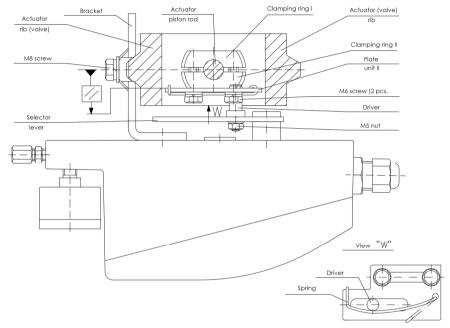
APIS-100-...type positioner with mounting set APIS-A003 (positioner assembled on actuator with control valve with rib – conforming PN-EN 60534-6-1:2001 standard e.g. on actuator manufactured by the Samson or Arca Regler companies)
